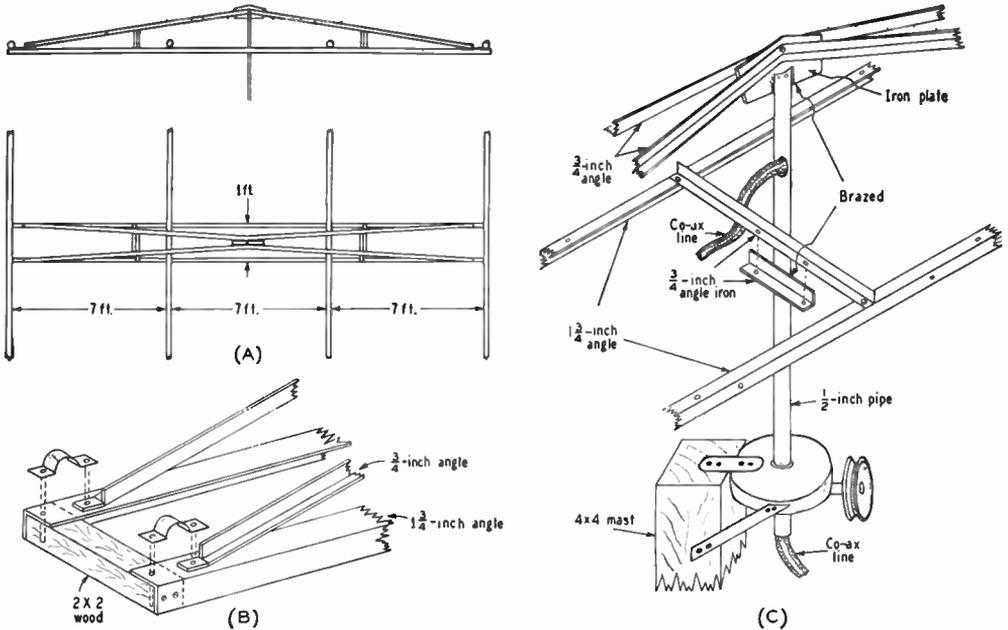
Details of the 4-element beam construction. The general dimensions and arrangement of the beam are given in A, the detail of the ends of the boom is shown at B, and C shows the construction of the central pivot. A discarded-forge blower gear train is used to drive the assembly.
